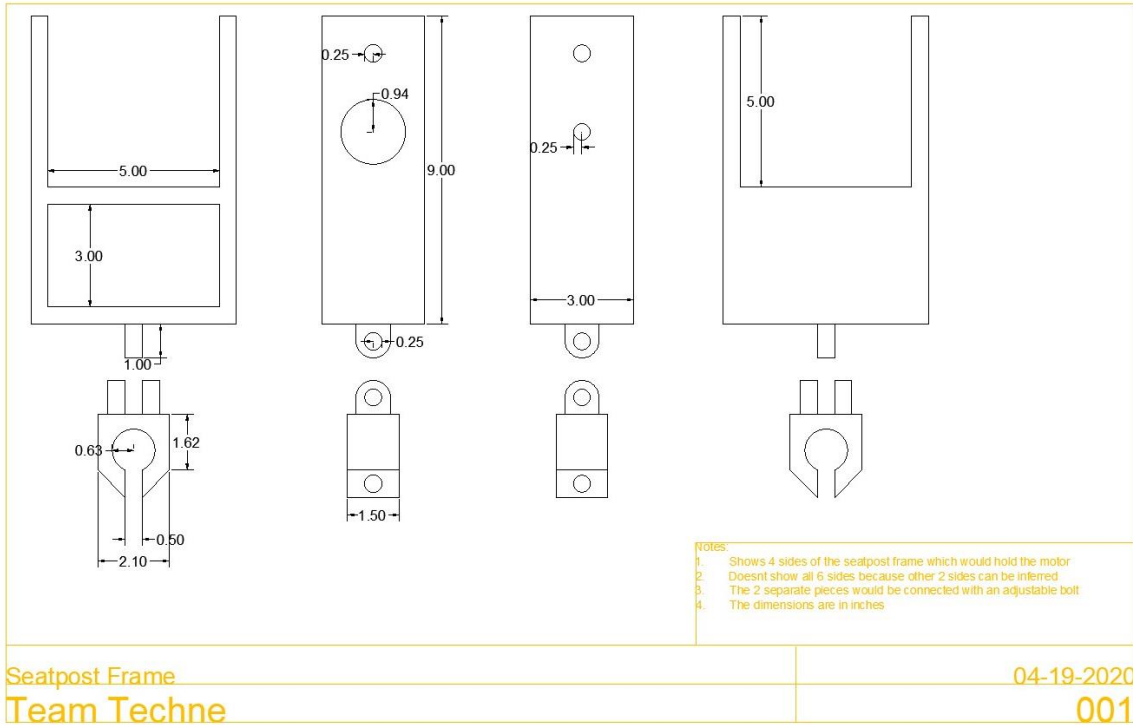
AutoCAD drawing of the Seatpost Frame
